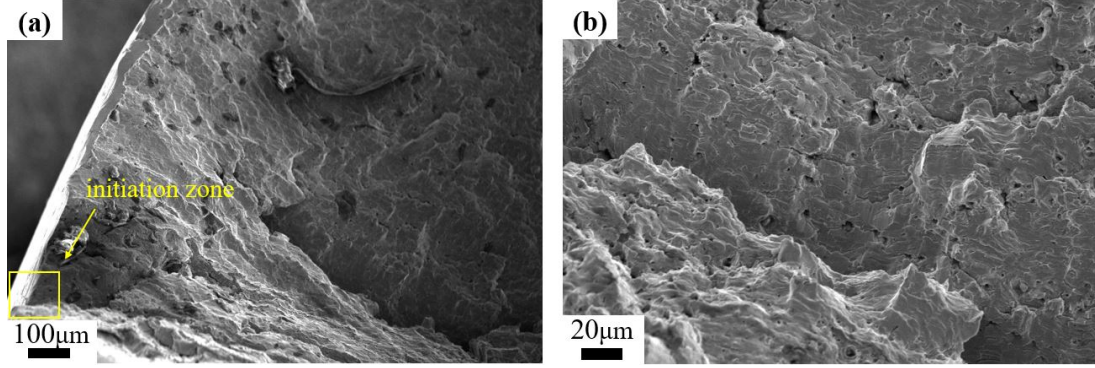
The fatigue fracture surface of unburnished 316L sample broken in 849.625 cycles, at 75% of σ_{yield} (a) crack initiation zone, (b) Crack propagation.
